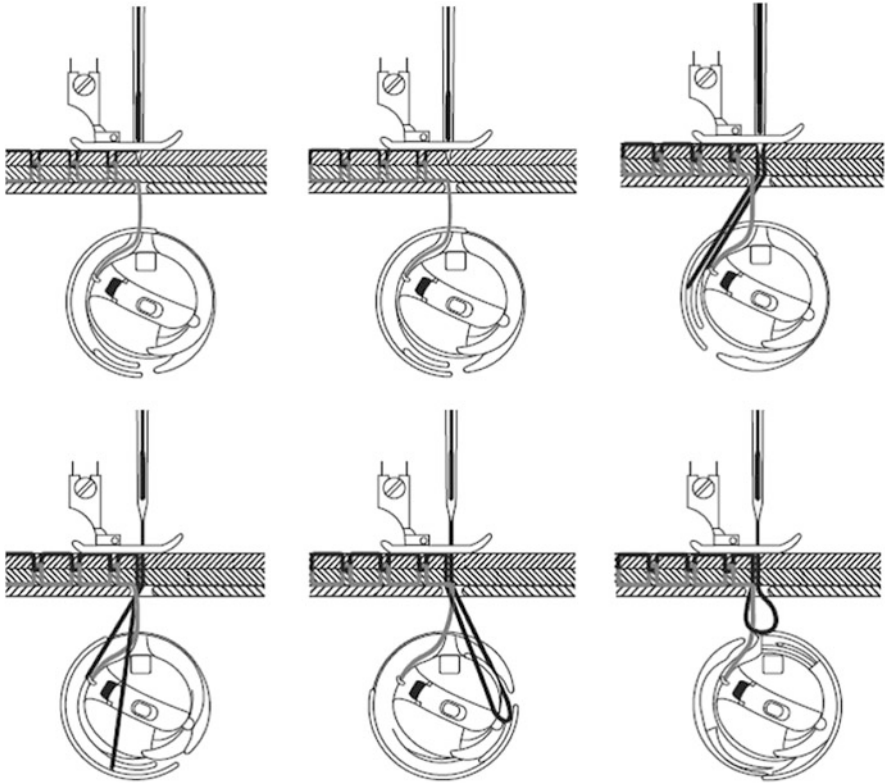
Thread arrangement in the double lock stitch—*top*: upper thread, *bottom*: lower thread of the bobbin stored in the gripper system—and stitch formation [12] (Source: Pfaff Industriesysteme und Maschinen AG)
